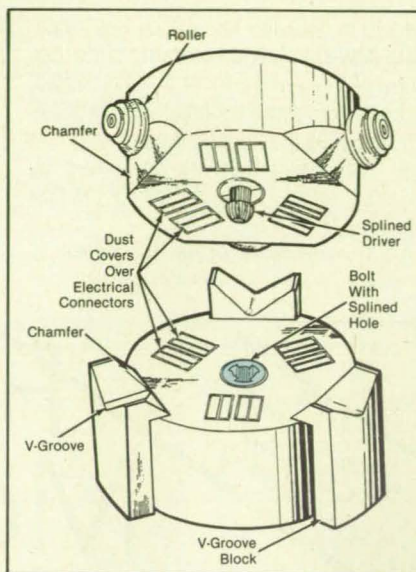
The Rollers and V-Grooves enforce the required alignment when the upper and lower assemblies are brought into firm contact.
